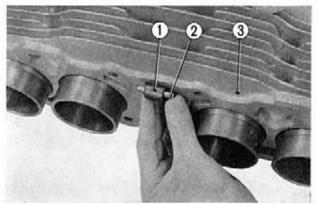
① Cam chain guide ③ Cylinder ② Cam chain guide pin
